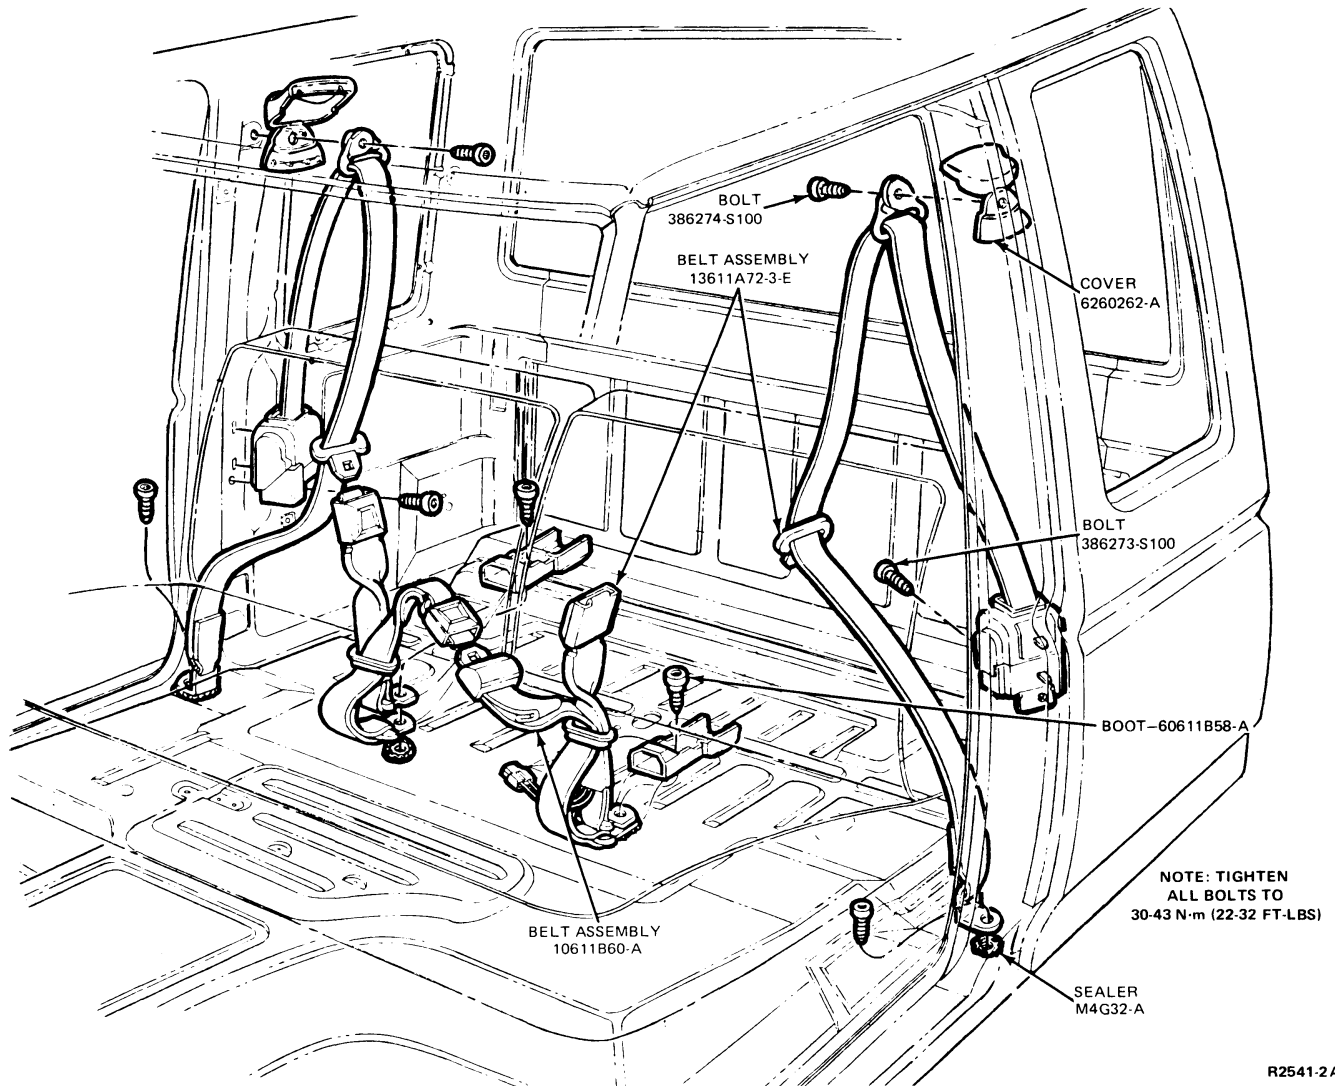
Front Seat Belt Installation—F-Series Super Cab
